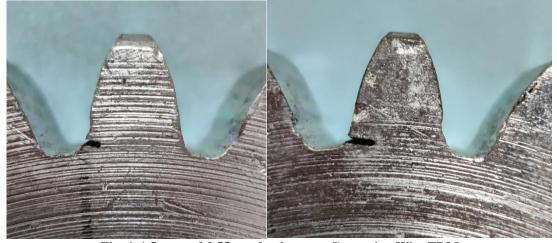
1.5mm and 2.55mm depth cut on Gear using Wire EDM
